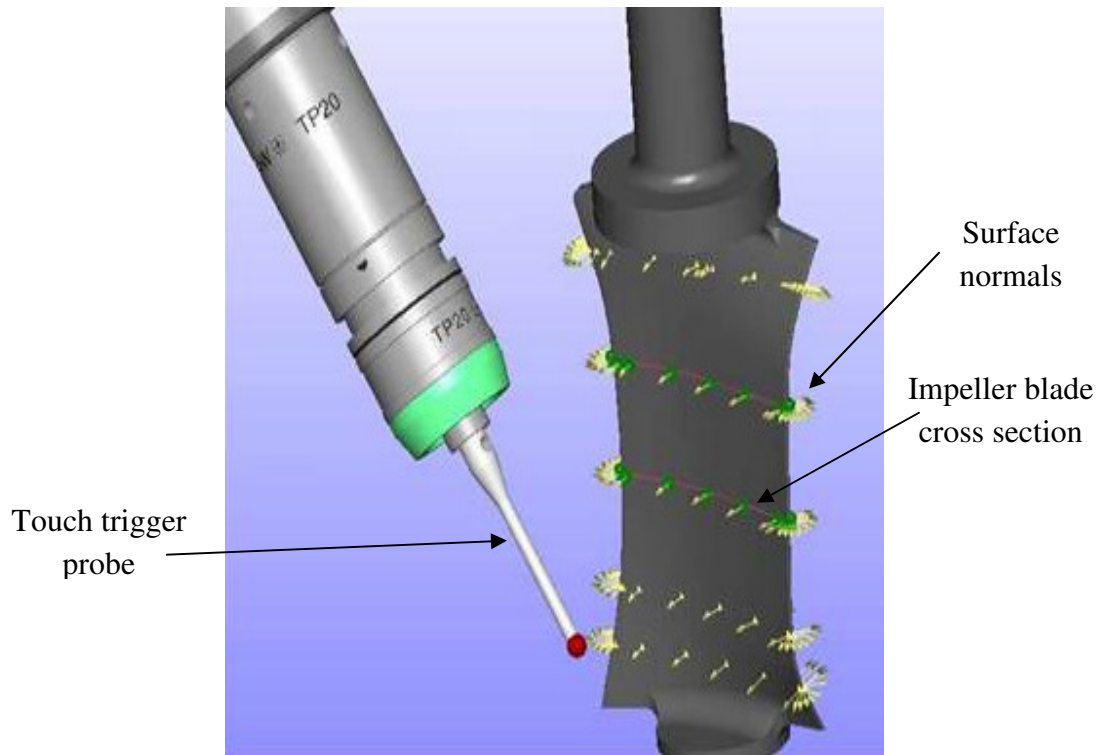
Impeller blade inspection along pre-specified airfoil sections using a touch trigger probe [28]
